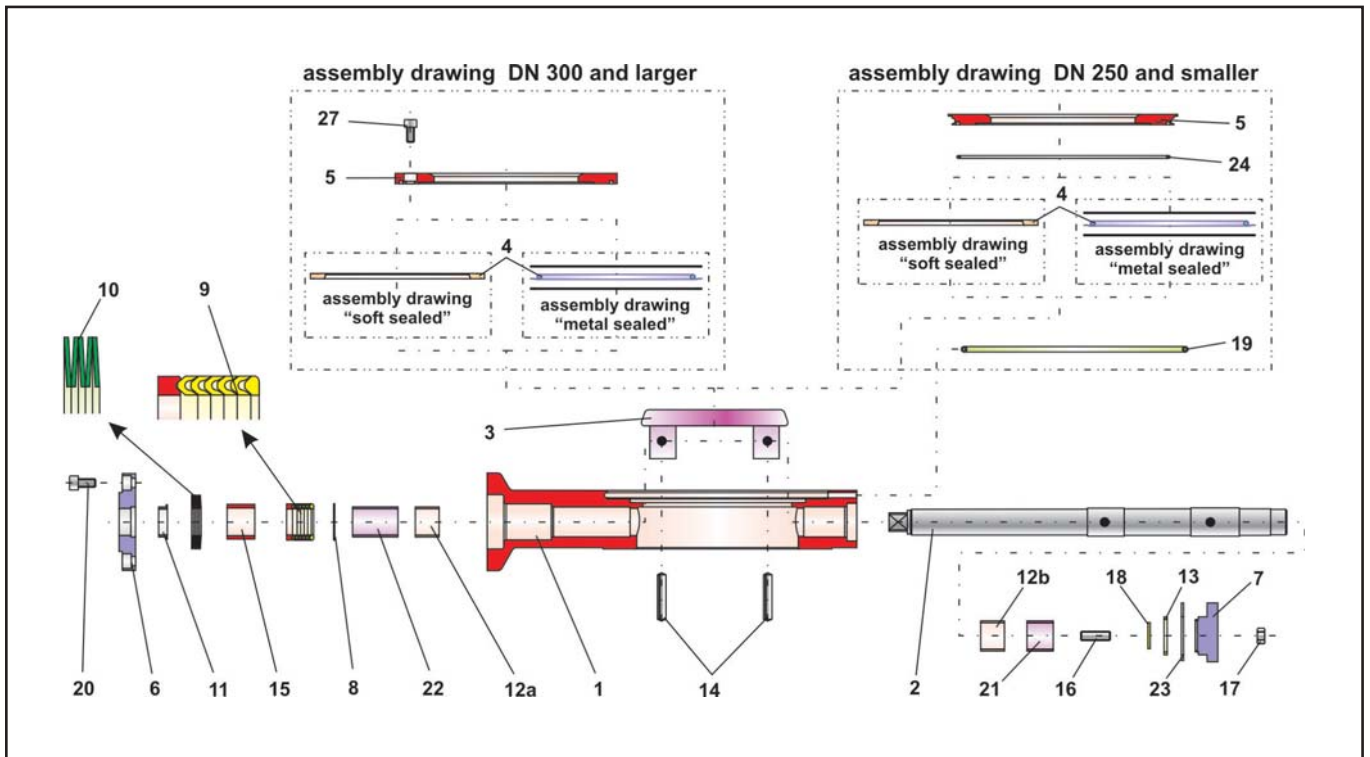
Exploded view of the Butterfly Valve Series 14b with live-loaded V-ring packing
